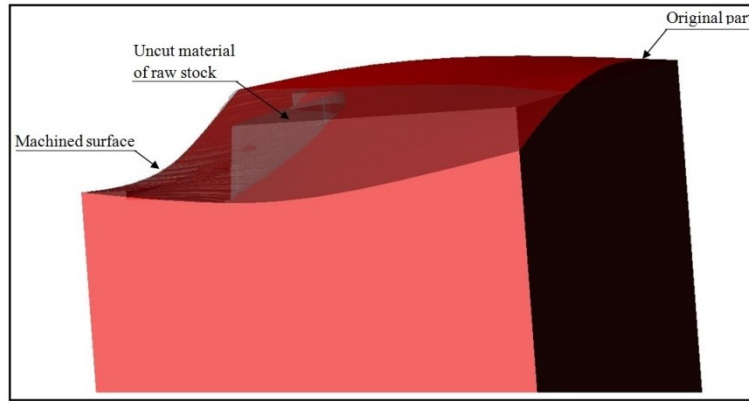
Visual verification of part 2 using 5-axis machining simulation.
